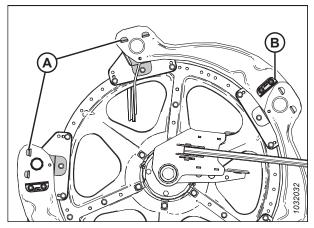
Reel Endshield Removed – Outboard Tail End
